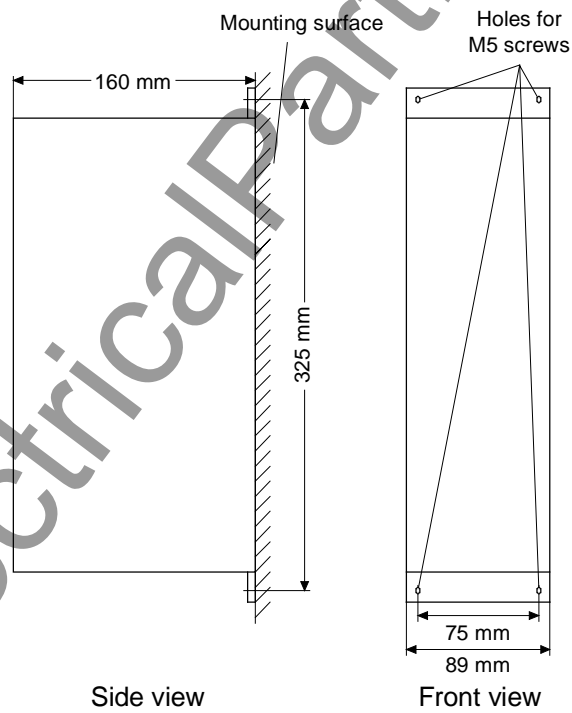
Dimension drawing of the 12 A / 18 A EMC filter
